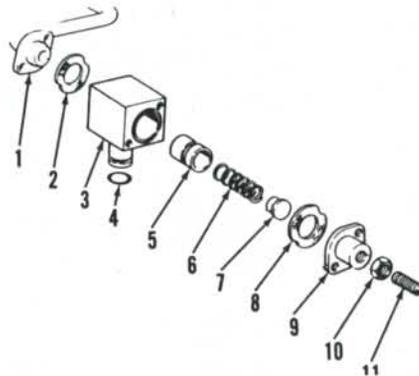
Exploded view of power shift sequence valve. Adjustment screw (11) setting should not be changed unless valve pressure is to be reset as outlined in paragraph 256.
